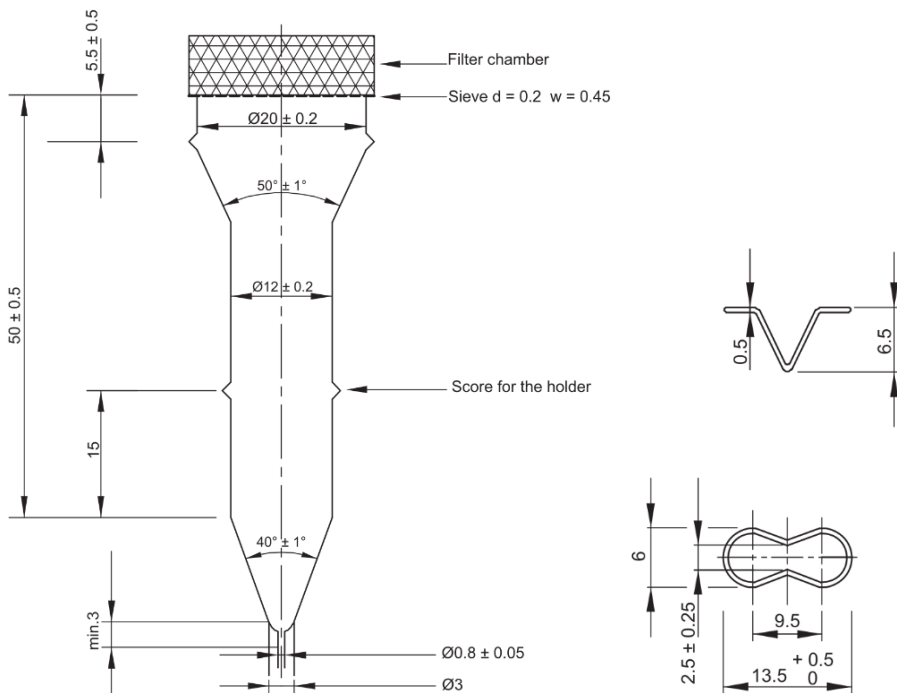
A sectional view of a USP 4 dissolution apparatus: small cell for tablets and capsules (upper picture part), tablet holder for small cell (lower picture part), dimensions in millimeters.
